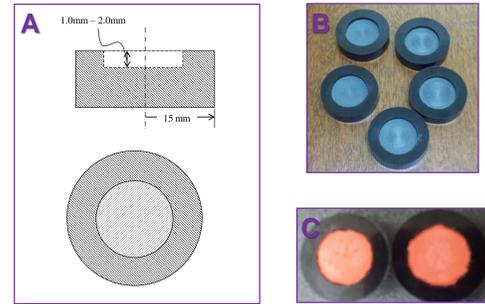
Specimen holder design and realization: A) technical drawing; B) empty holders; C) specimen ready for testing.
